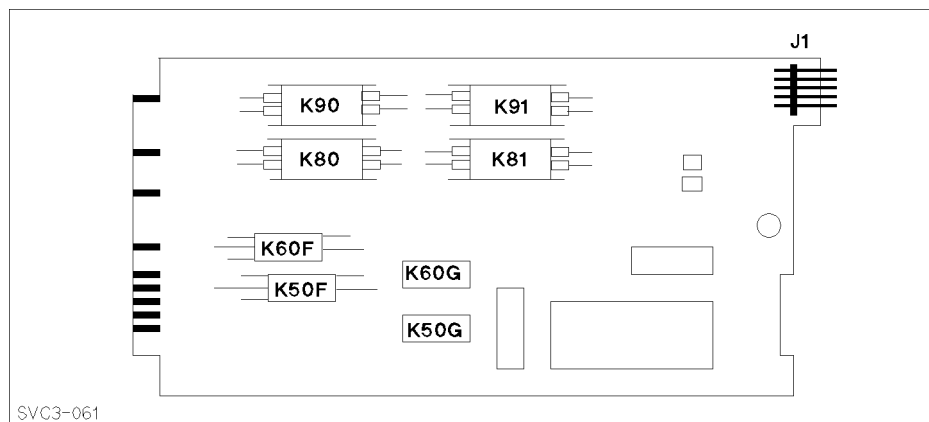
Part Locations of AUX Port Board—96-pin SWM
